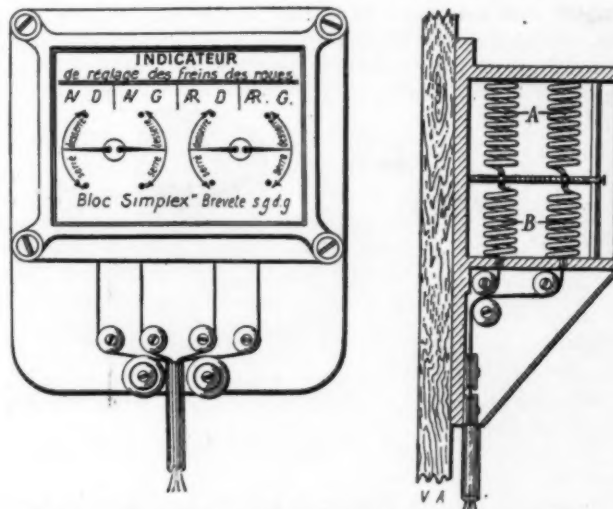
Details of dashboard indicator of Hamon four-wheel brake.
